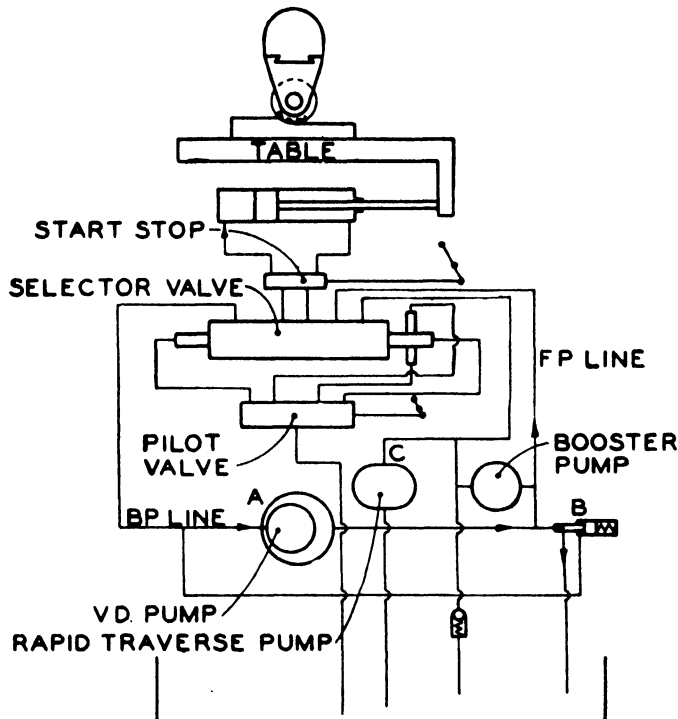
Locked hydraulic circuit of Hydromatic milling machine. (*Cincinnati Milling Machine Co., Cincinnati, Ohio.*)
